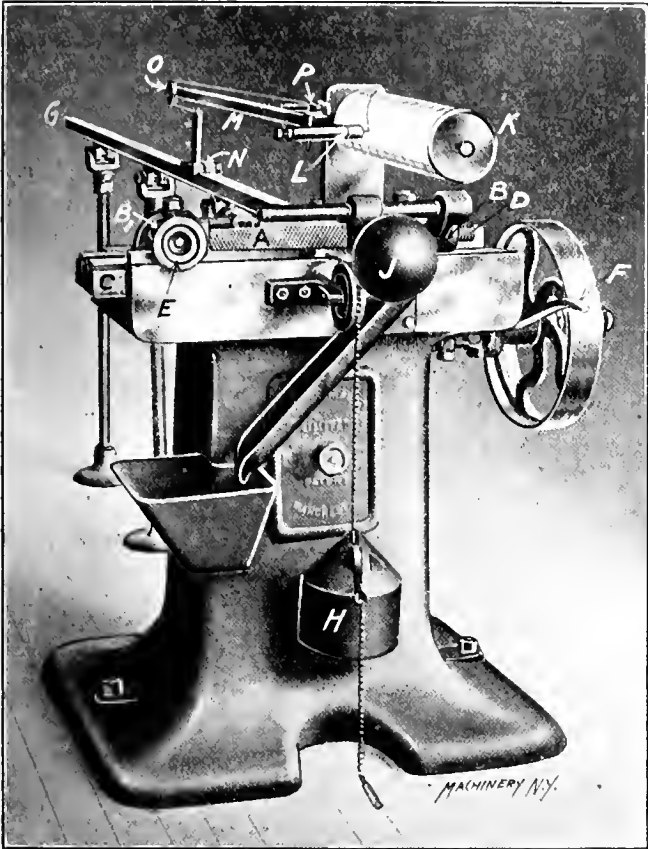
File-testing Machine built by Edward G. Herbert, Ltd.
